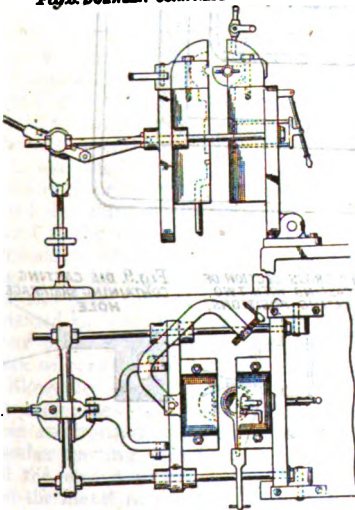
UNDERWOOD DIE-CASTING MACHINE
